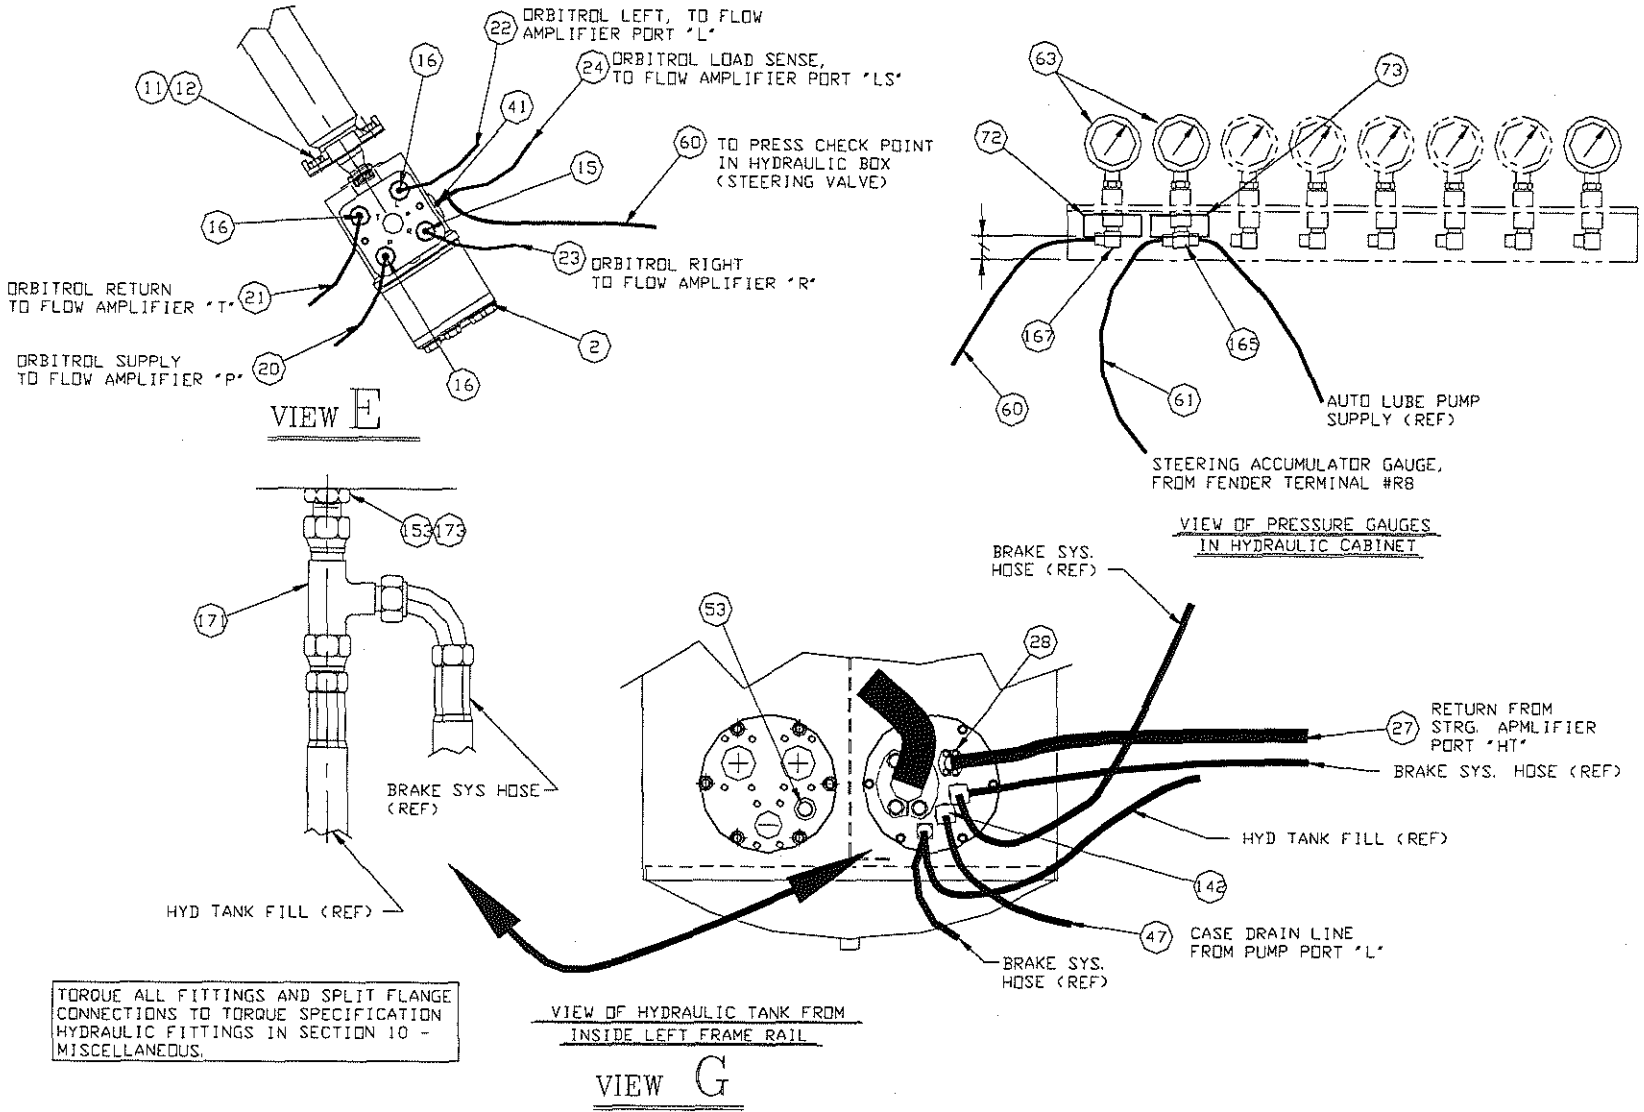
STEERING SYSTEM ASSEMBLY (A85180, SHEET 4 OF 9)
